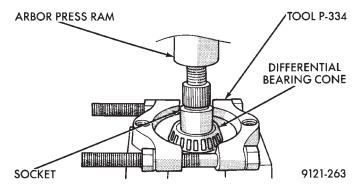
Remove Differential Bearing Cone (All Wheel Drive)
